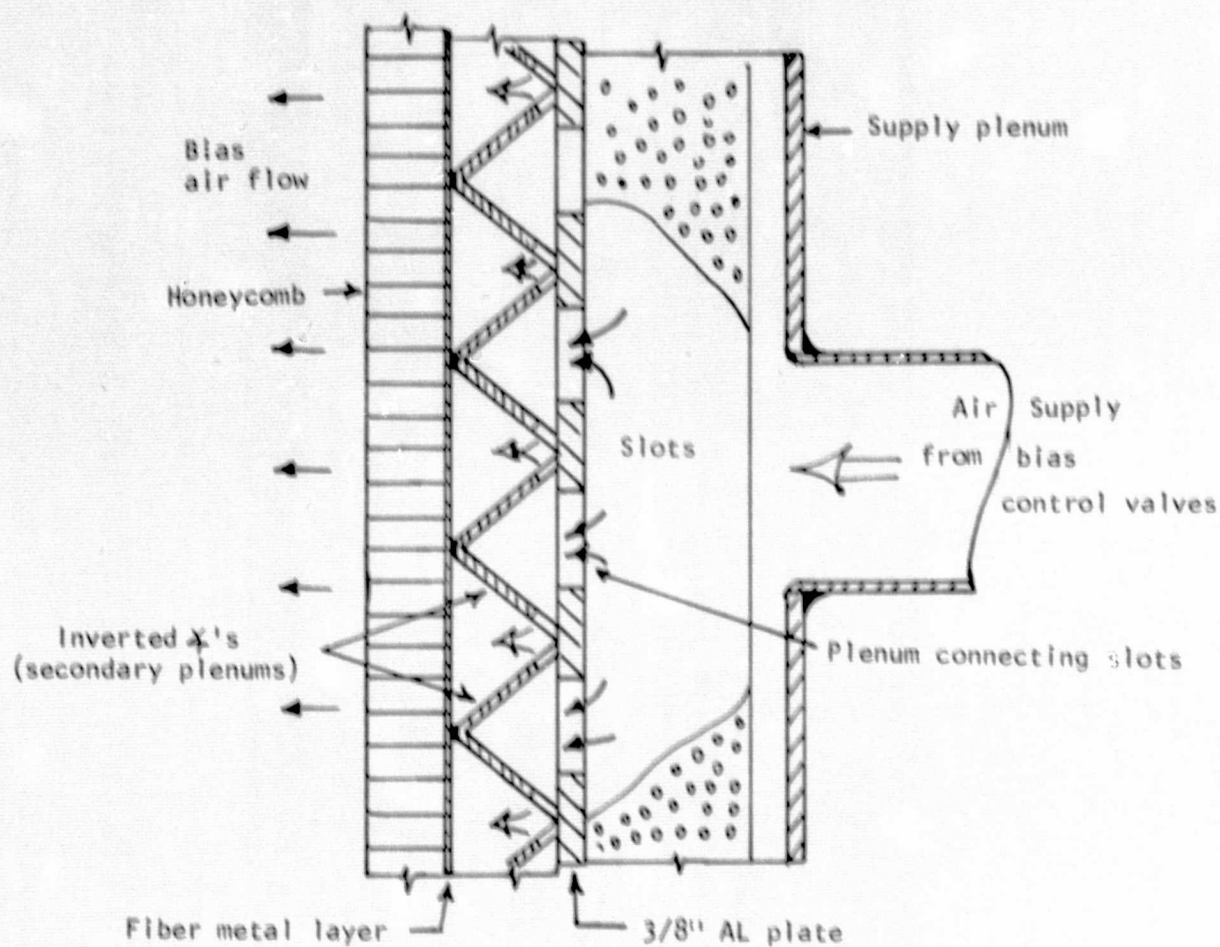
(a). CONSTRUCTIONAL DETAILS OF LINER HARDWALL BACK PLATE
